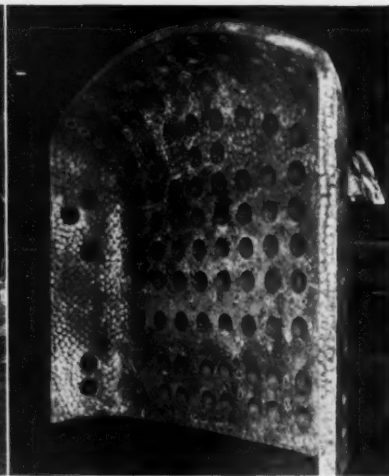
Aluminum Alloy Bottom of Dragline Bucket.
